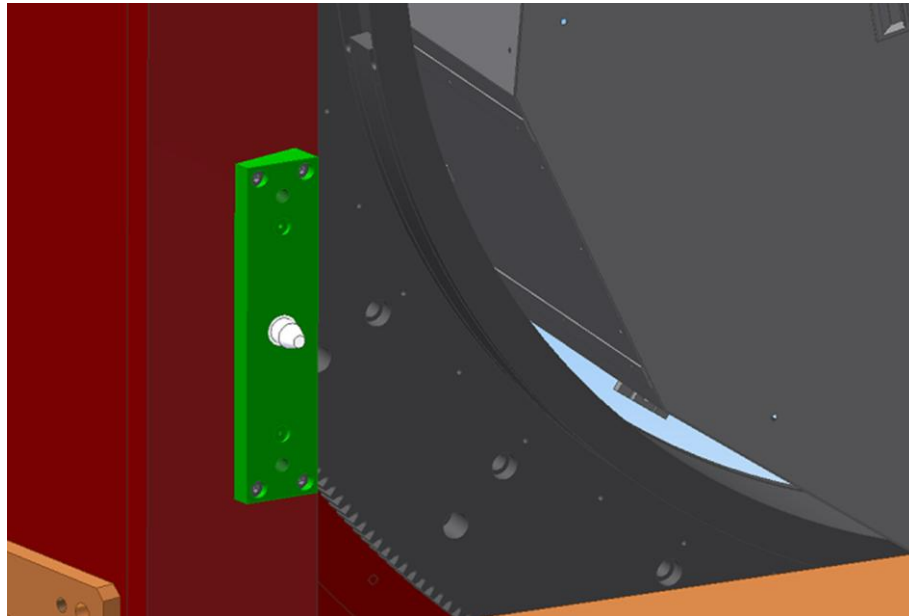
Each interface plate is bolted to the rotator structure by 4 M10 bolts. The holes on the rotator structure are blind holes with 15-20mm threading
